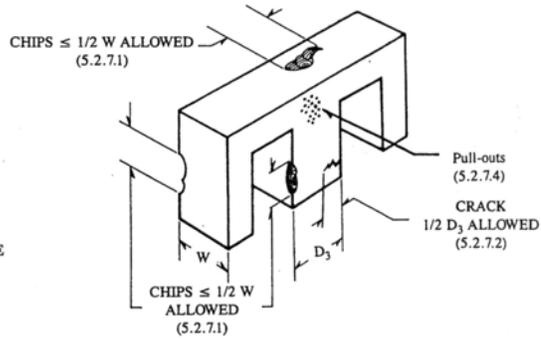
CHIPS & CRACKS NON-MATING SURFACES
